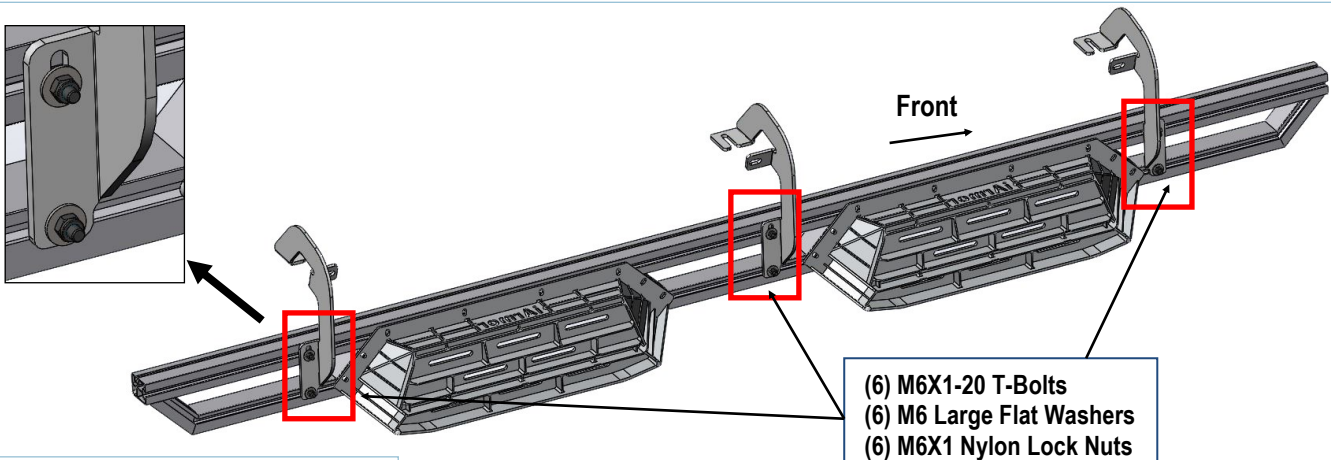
Driver Front Mounting Bracket (DFM/PRM) Installed
